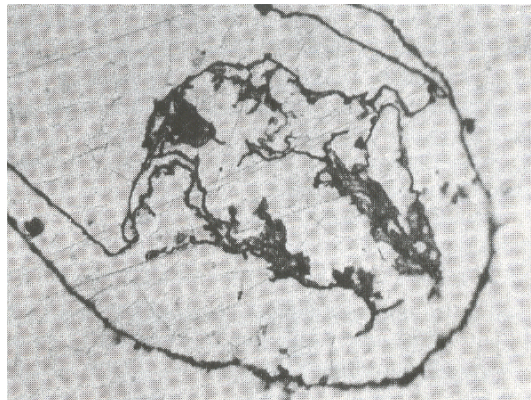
Casting defect - oxide film [Altenpohl, 1994]
